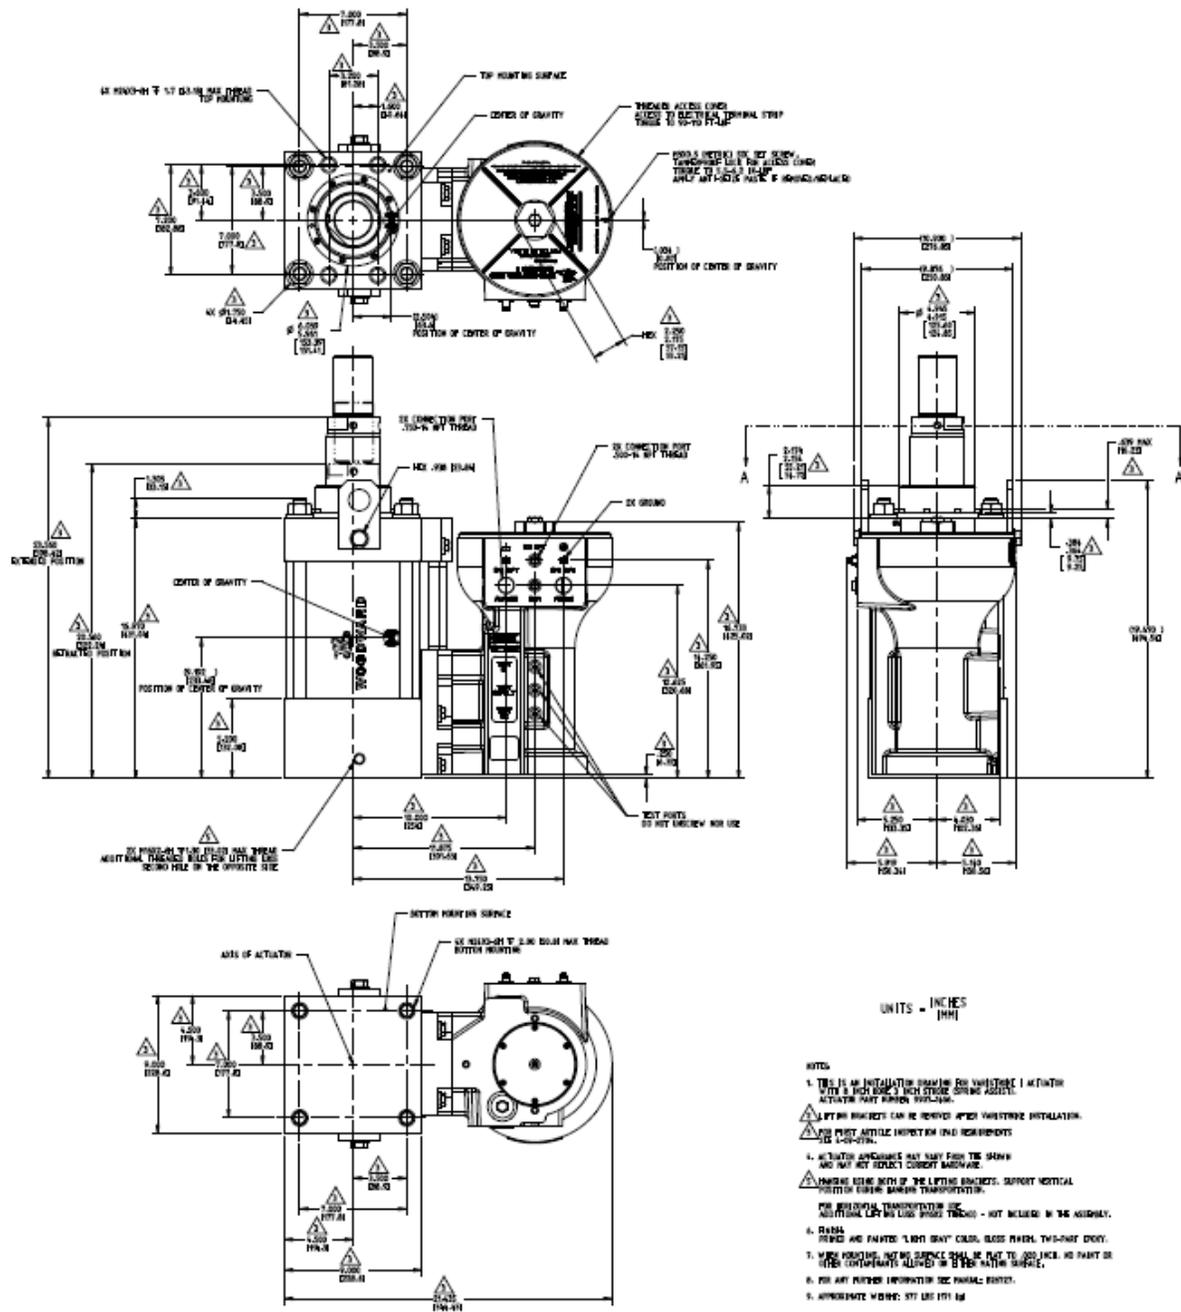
V45TT-2007-MUE Integrated Spring Assist Installation Dimensions
